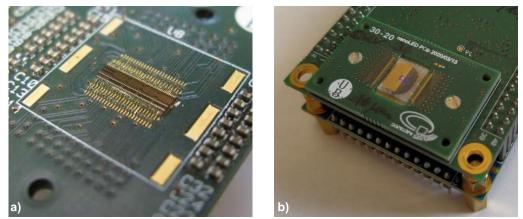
a) The LED driver is wire-bonded to the main PCB with 64 wires. b) The separate PCB with the mounted GaN LED chip, which is connected to the main PCB by an interposer.
